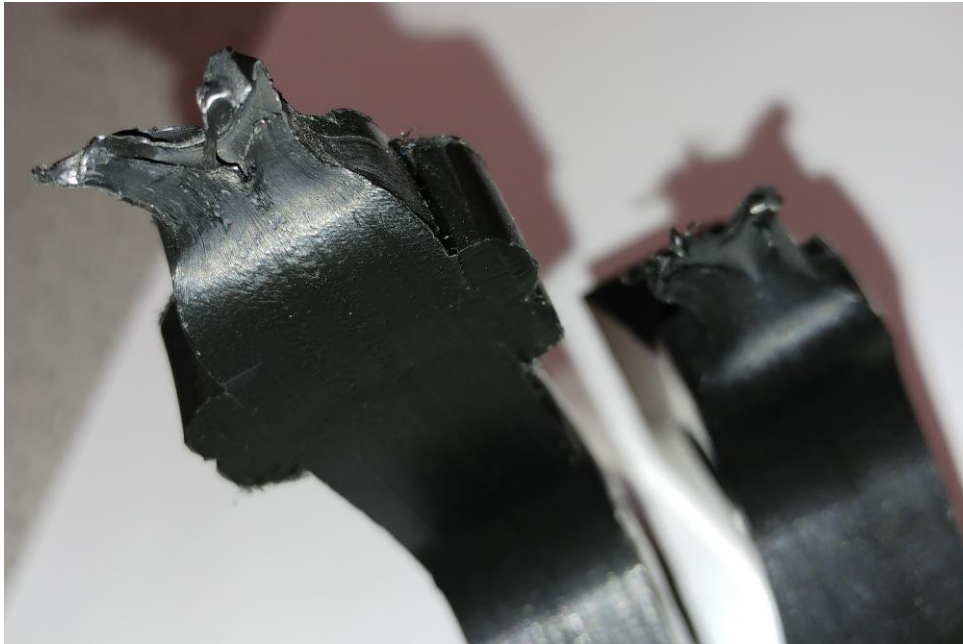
Image of typical failure in a typical high speed tensile impact test specimen featuring ductile fracture surfaces at the weld
